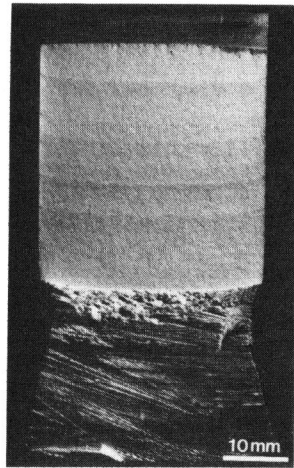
Crack surface appearance after open breaking of bend specimen.
